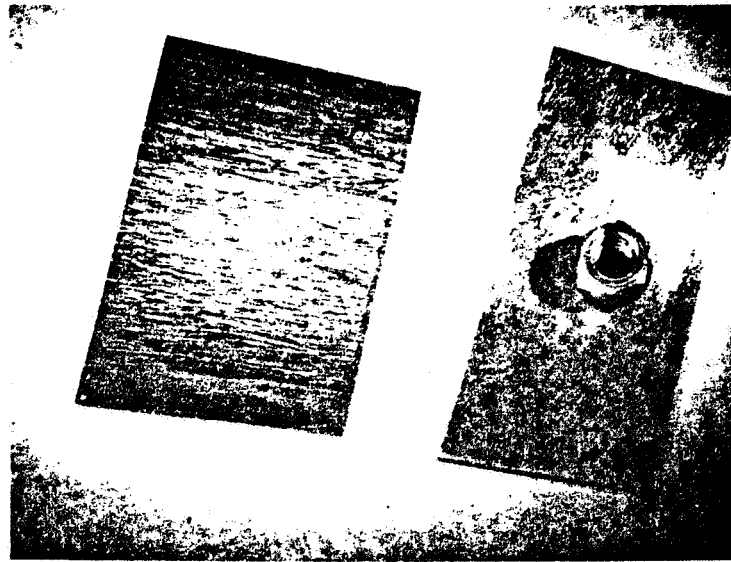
Photograph of two identical samples showing the ability of Ultrapulse to weld a part (a nut in this case) to the back of vinyl-coated steel sheet.
